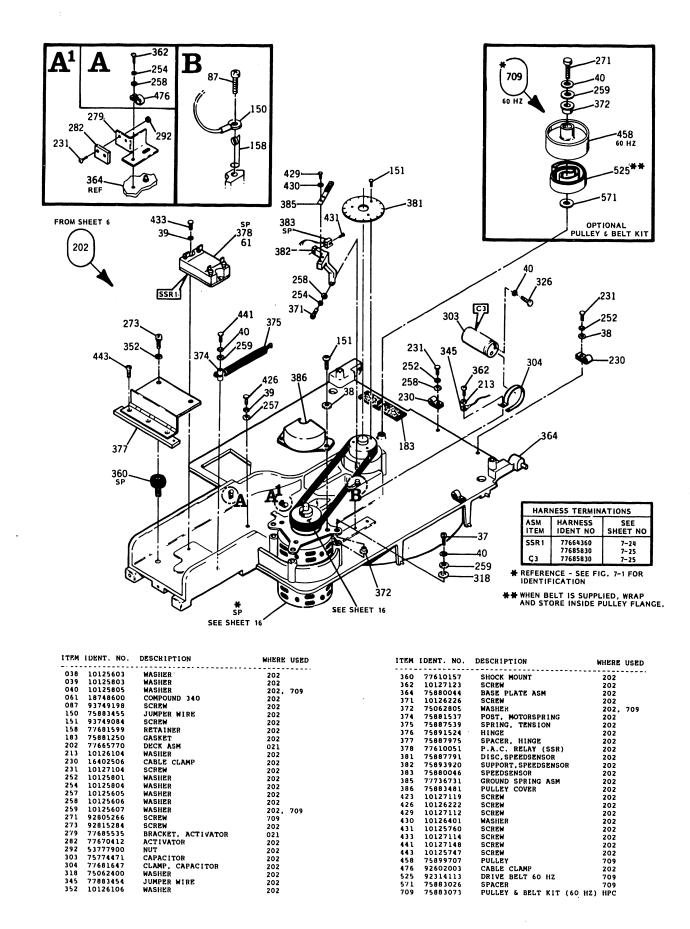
DECK ASSEMBLY (3 OF 3)
